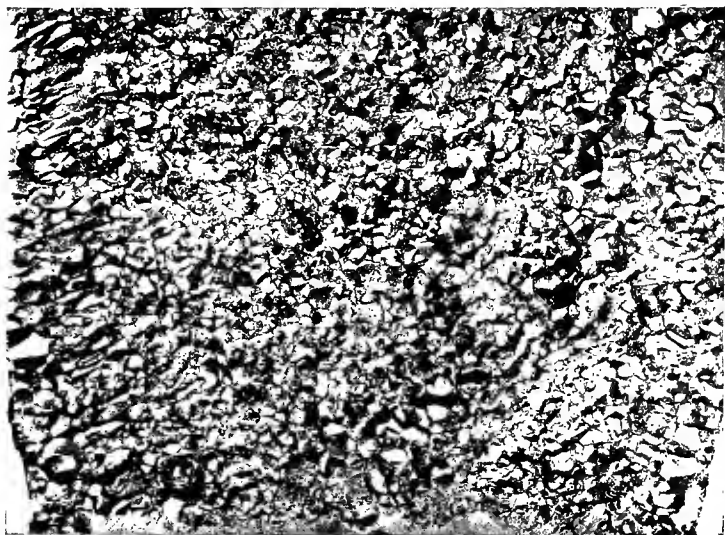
Crystalline fracture of large steel casting. Linear reduction about one-third.
